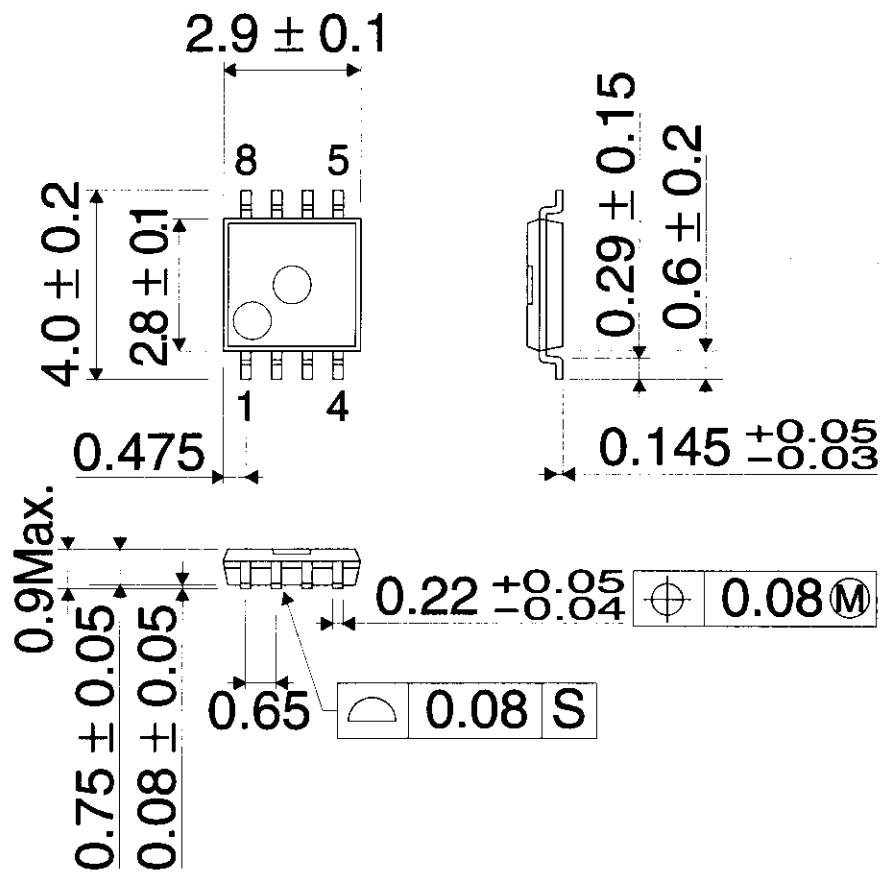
Outline Dimensions MSOP8(BR93L66RFVM-W)
